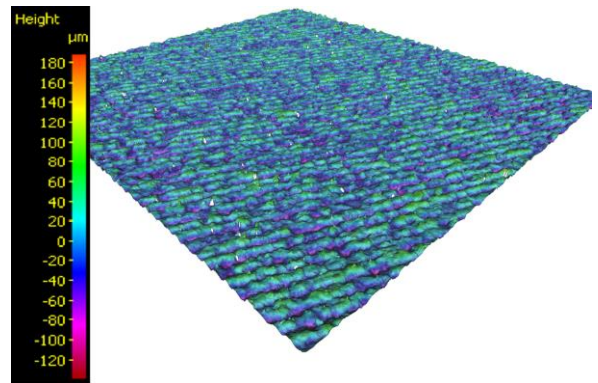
A view of the primary product surface of the HP Jet Fusion 4200 printer
